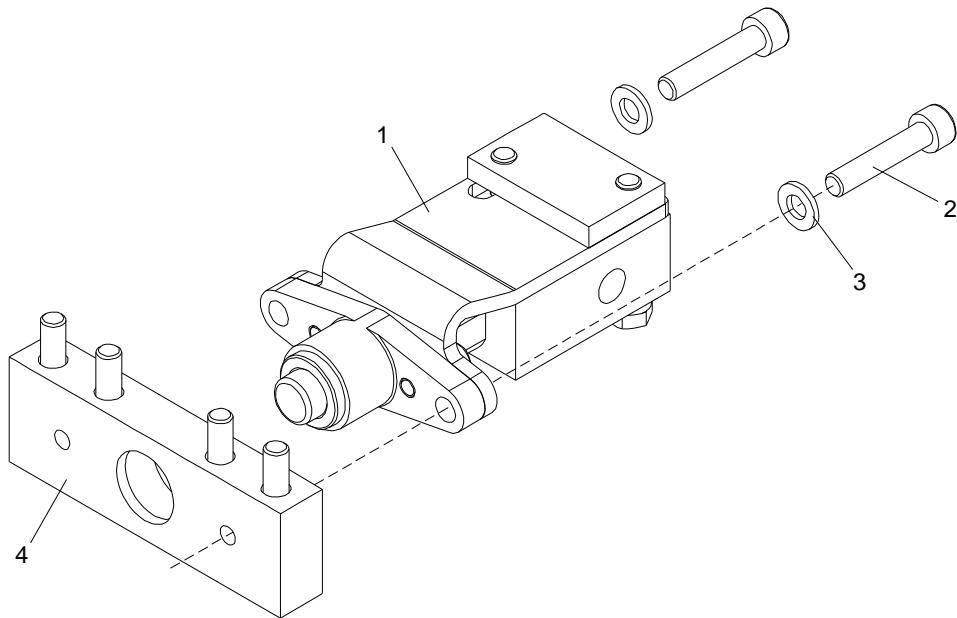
Replacement of Key Indicator Valve Assembly (V5)
